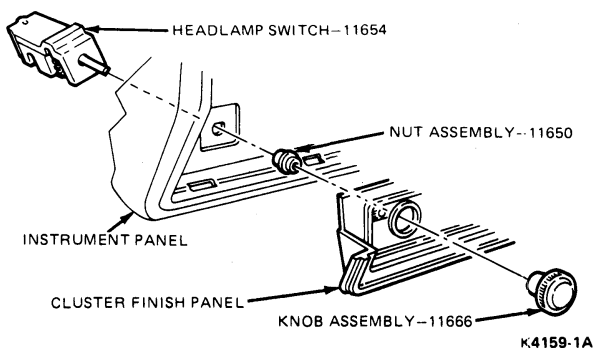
Headlamp Switch Installation—F-100—F-350 and Bronco
